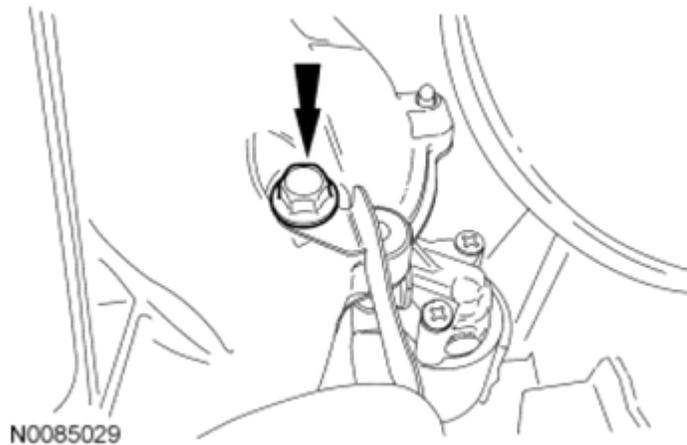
Locating Transmission Fluid Cooling Tubes Rear Support Bracket Bolt
